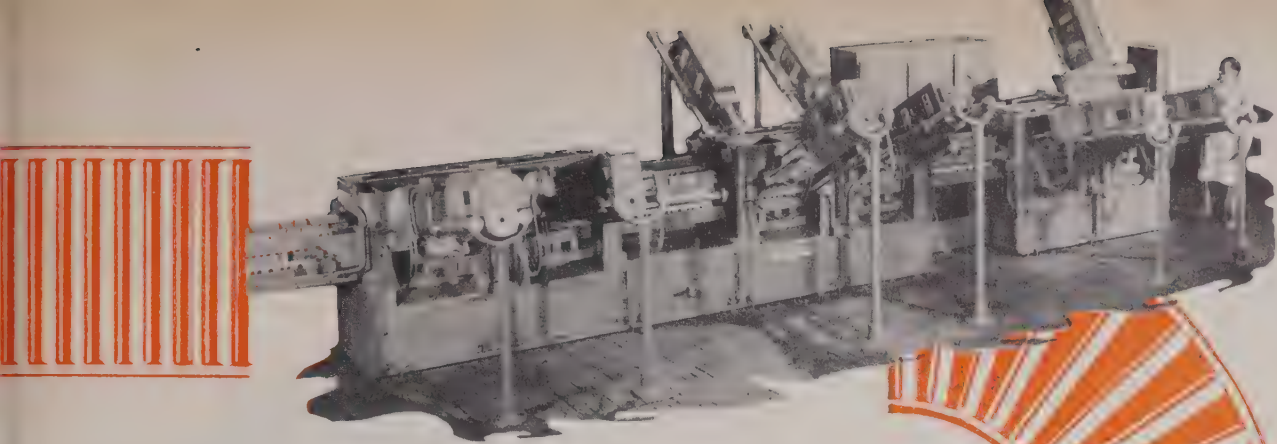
This Ingersoll six-station drilling machine, the oil lead holes, angular oil holes, the oil pump suction hold, and the distributor hole are drilled and finished. Operations in addition to drilling include reaming, counterboring, countersinking and tapping.
